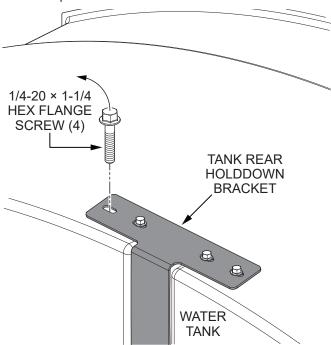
Remove Hex Flange Screws (Rear Of Tank)
